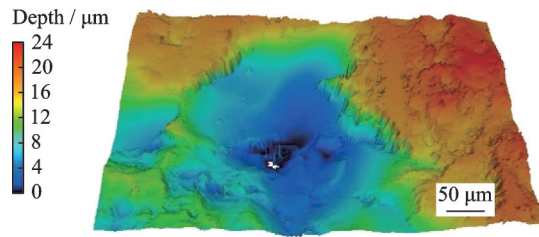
Three-dimensional morphology of sapphire surface after milling and grinding
